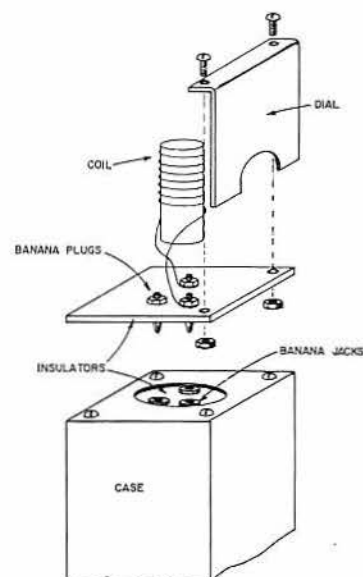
Construction of the plug-in coil assemblies. The coil forms were made from the plastic containers which hold Polaroid print coater.
